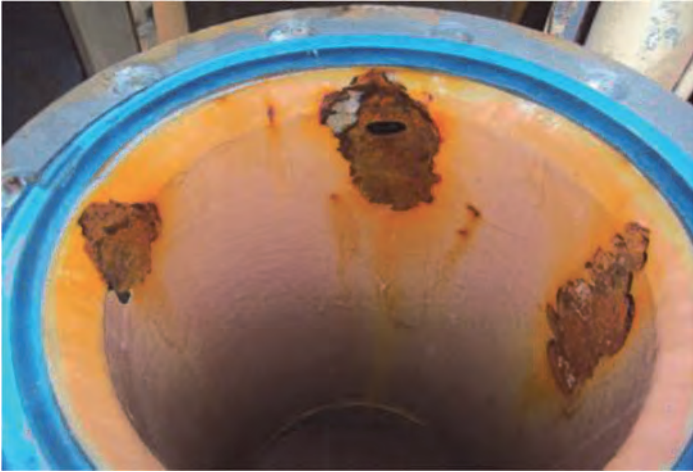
Corrosion around welded parts between distance piece and flange
